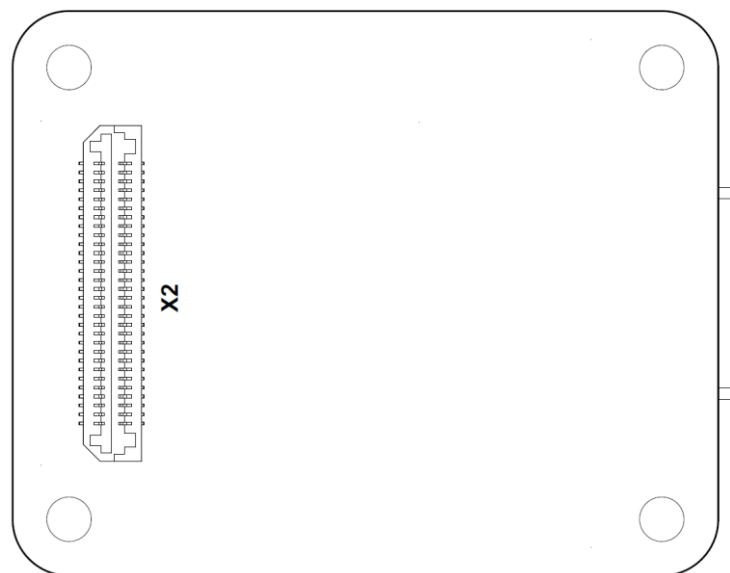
Verdin DSI to HDMI Adapter (bottom side, bottom view)
